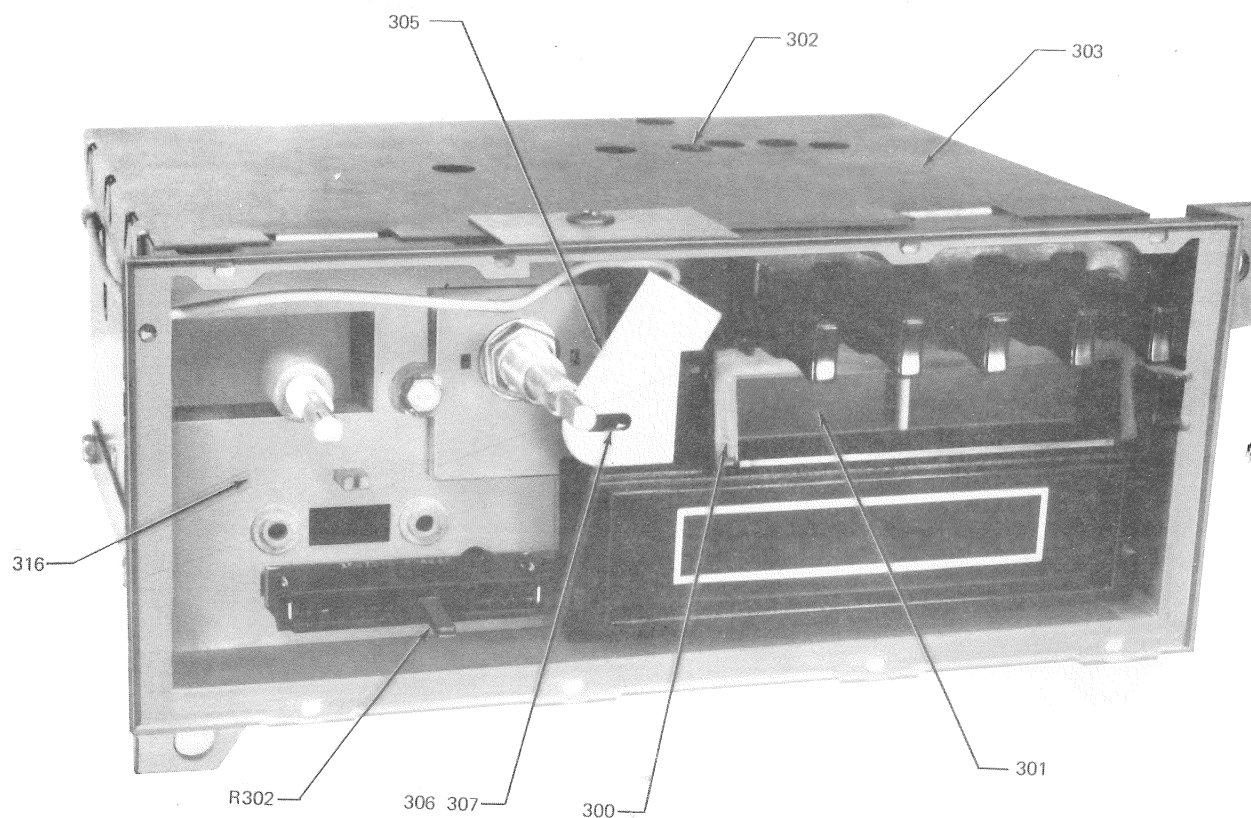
PARTS LOCATION, LENS ASSEMBLY REMOVED (3501457)
